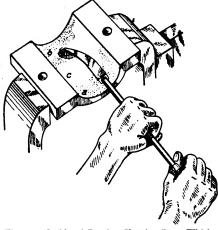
Inside of Bearing Showing Spots Which Need Scraping
